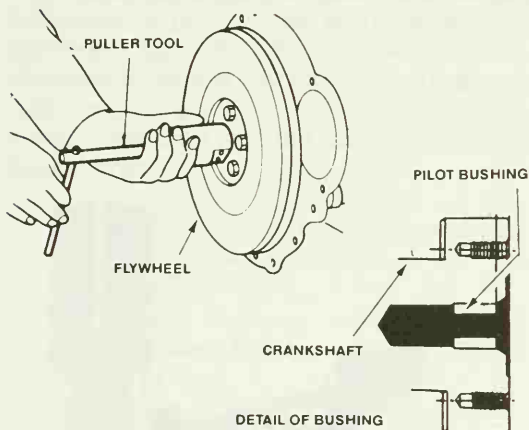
A puller is used to remove the pilot bearing. (Buick Motor Division of General Motors Corporation)
